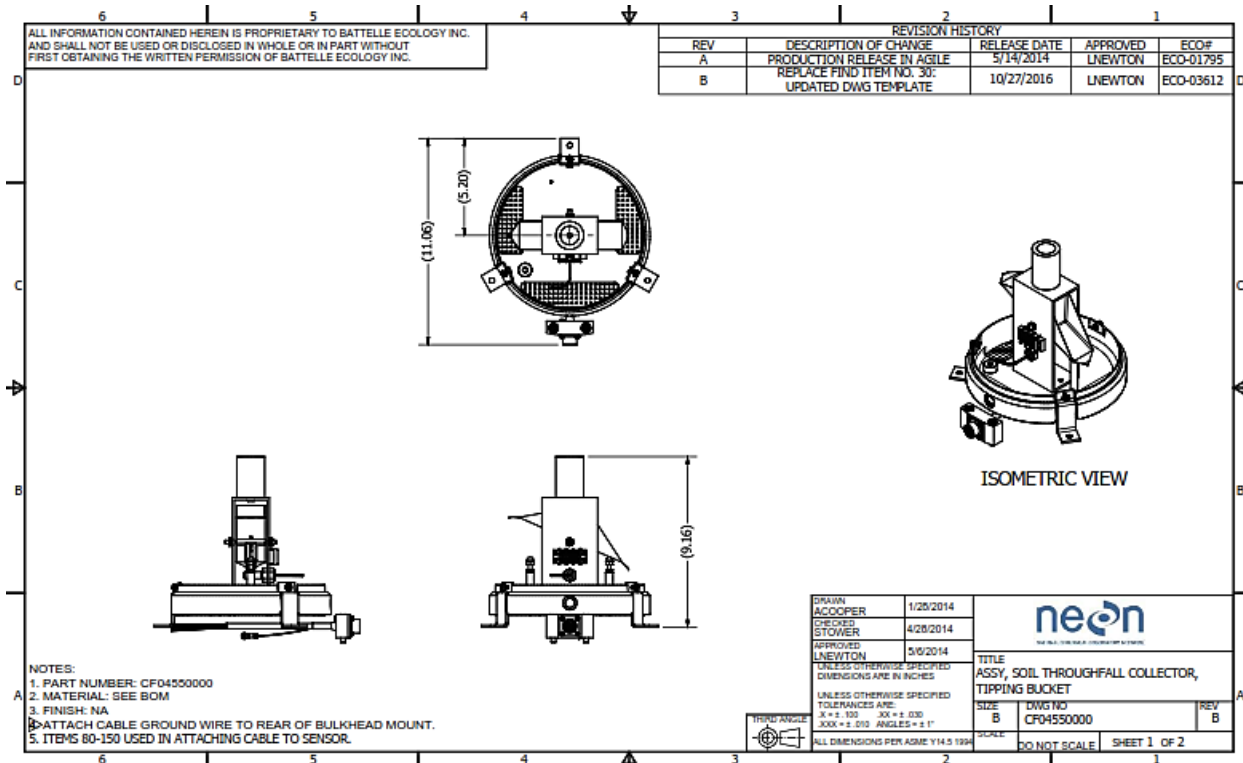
Inspect Tipping Bucket & Mechanical Tipping Mechanism.
